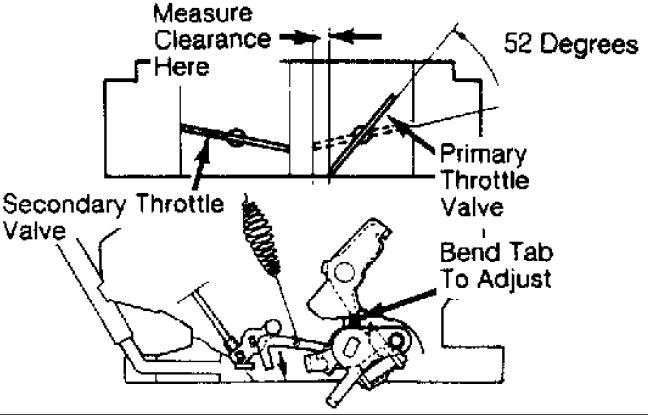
\overline{3}$: Adjusting Secondary Throttle Valve Courtesy of Mazda Motors Corp.
